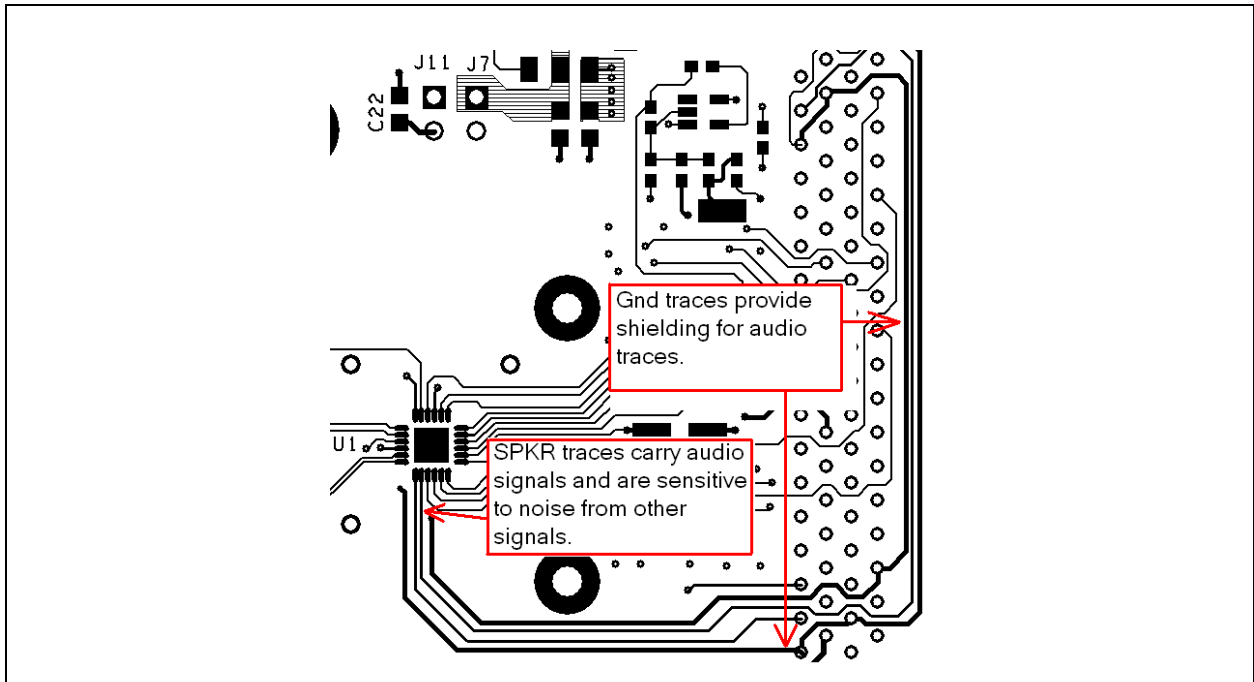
Example of Routing SPKR Traces from QFN Package
